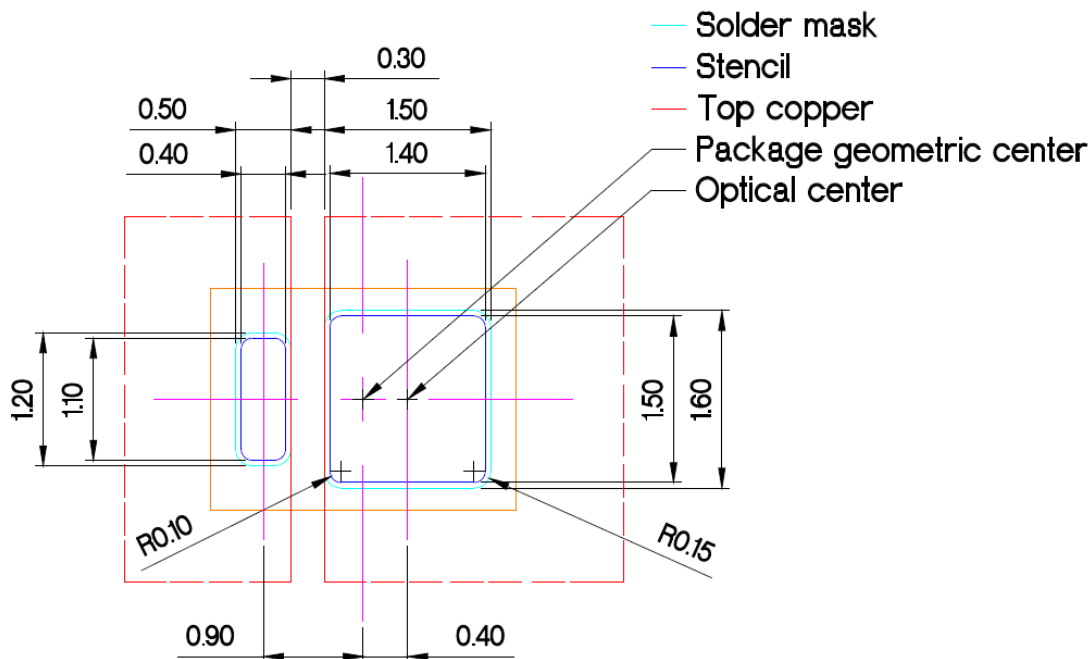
Recommended PCB solder pad layout for NIR LED H2O.
